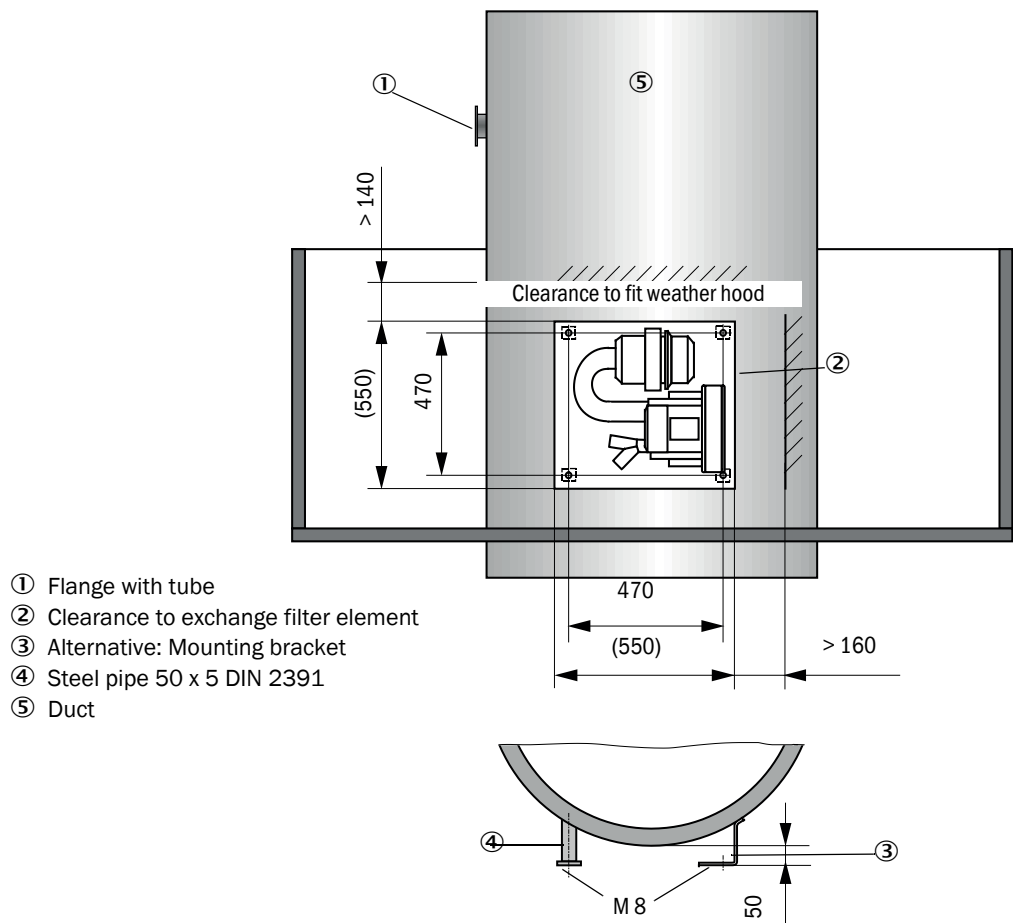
Purge air unit layout and assembly dimensions (dimensions in mm)
